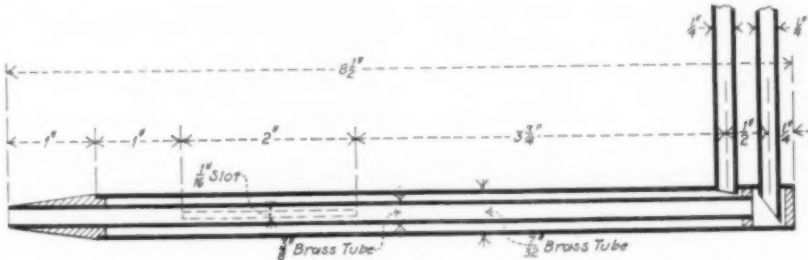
DIMENSIONED SKETCH OF PITOT TUBE X
